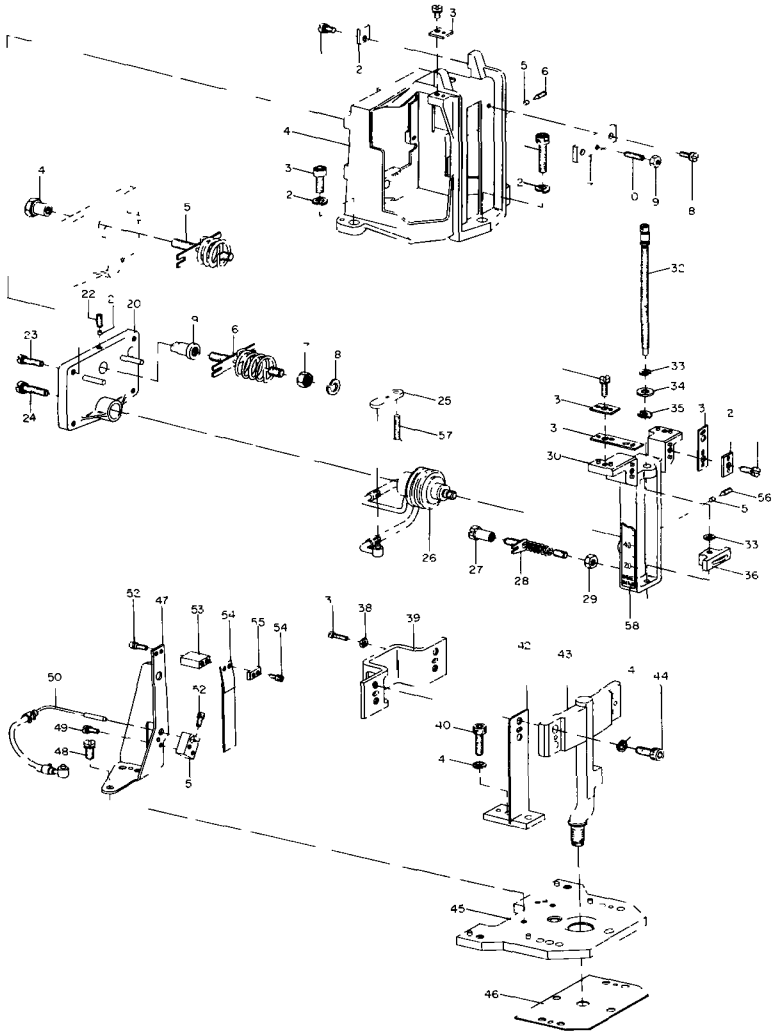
Parts Drawing P21 28, Internal Mechanism for
